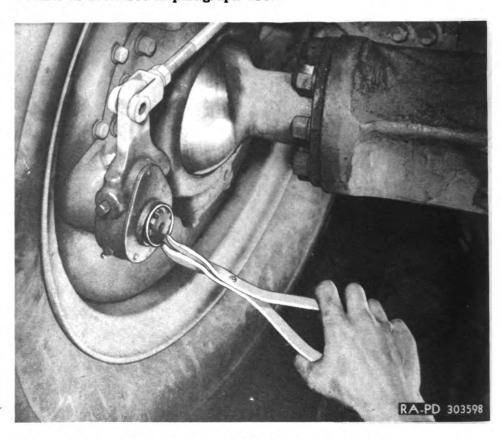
Removing Front Slack Adjuster Retainer Snap Ring
